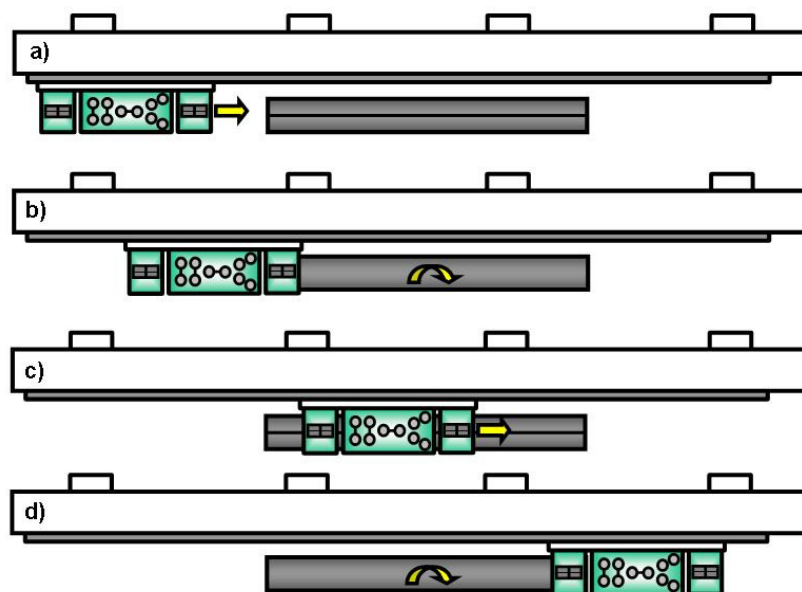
Testing Portal for offline weld- and pipe end testing. a) approach of testing carriage towards resting pipe, b) test of front pipe end, c) weld testing with weld in 12-o'clock position, and d) test of second pipe end.
